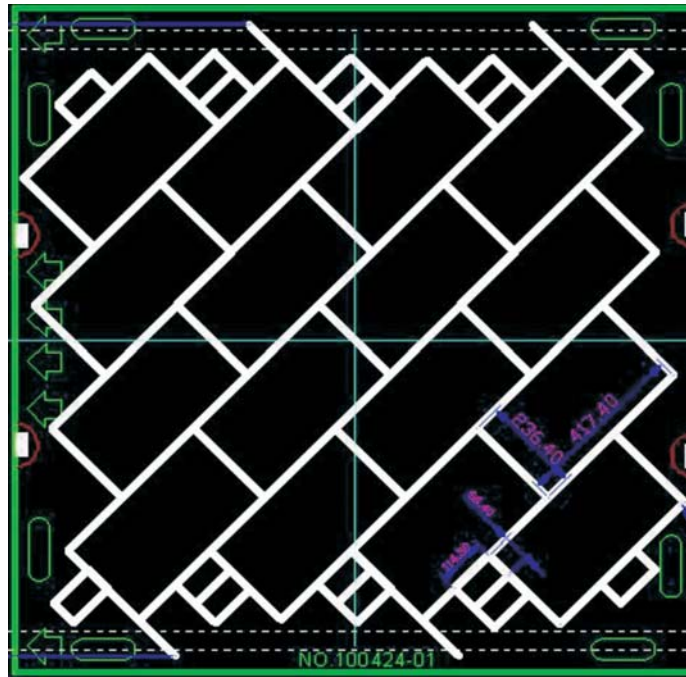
Knife Mold of Polarizer Cutting (2 in 1)
